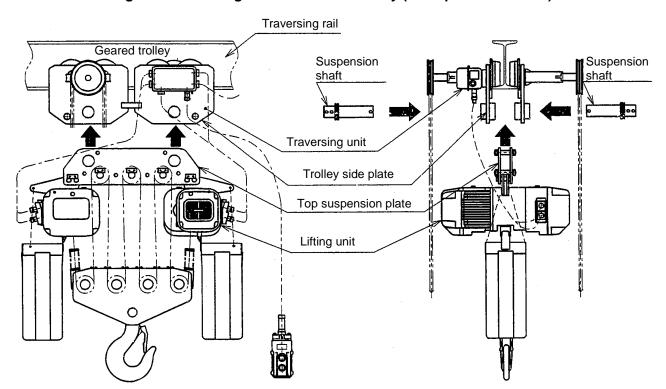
Connecting ER hoist to TSG trolley (Example of 15t or 20t)
